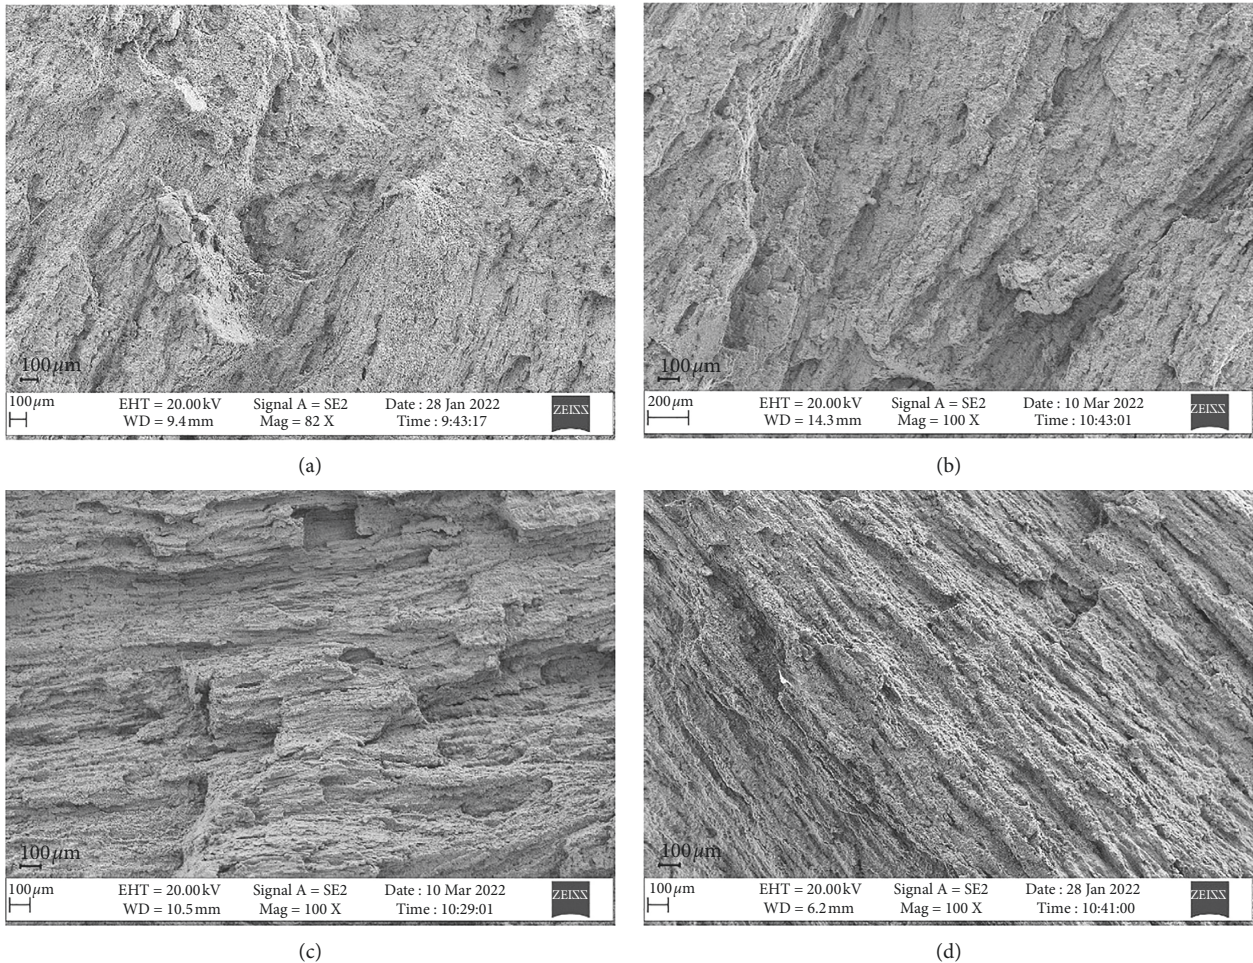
SEM pictures of fractured SSRT test specimens of welded joints. (a) M-L7 at 750°C, (b) M-L6 at 800°C, (c) M-L4 at 850°C, (d) M-L1 at 900°C.
